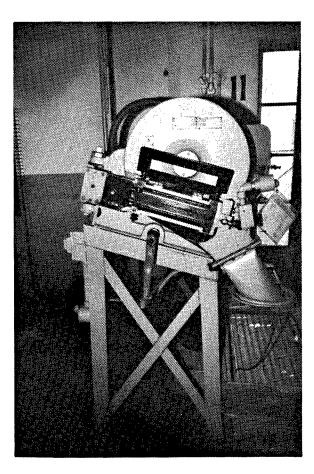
Building 4516-2: Cutting machine driven by 1.5 HP and 1140 RPM electric motor manufactured by McKiernan-Terry. This machine cuts strands of powder produced by the presses.
